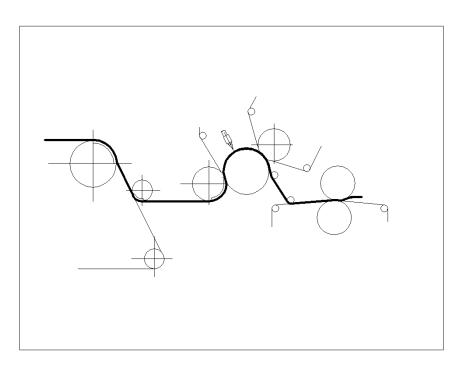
Schematic view of location of laser cutting implementation in press section of paper making machine.
